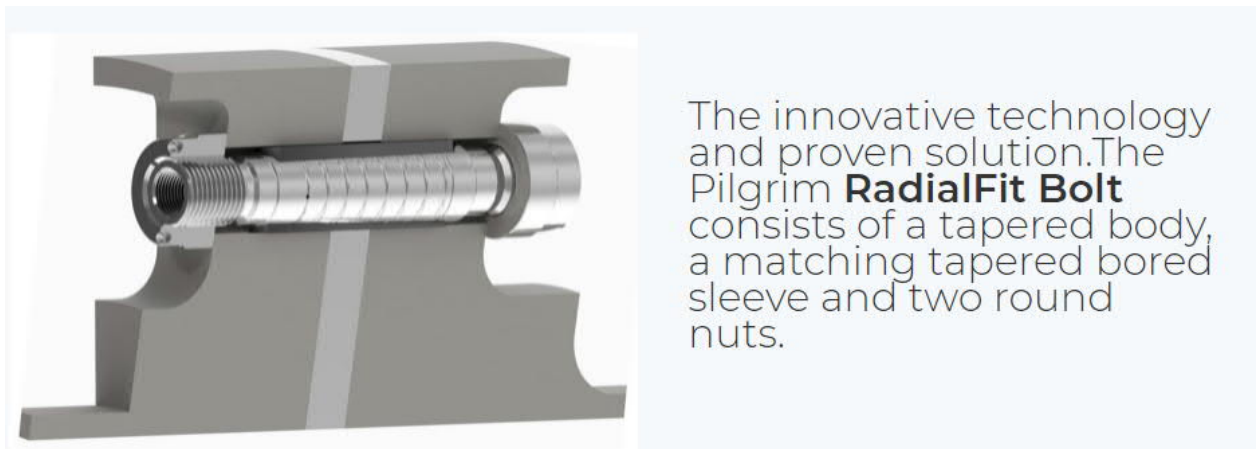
Sketch from the Pilgrim Website Showing Their Style Hydraulic Bolt
